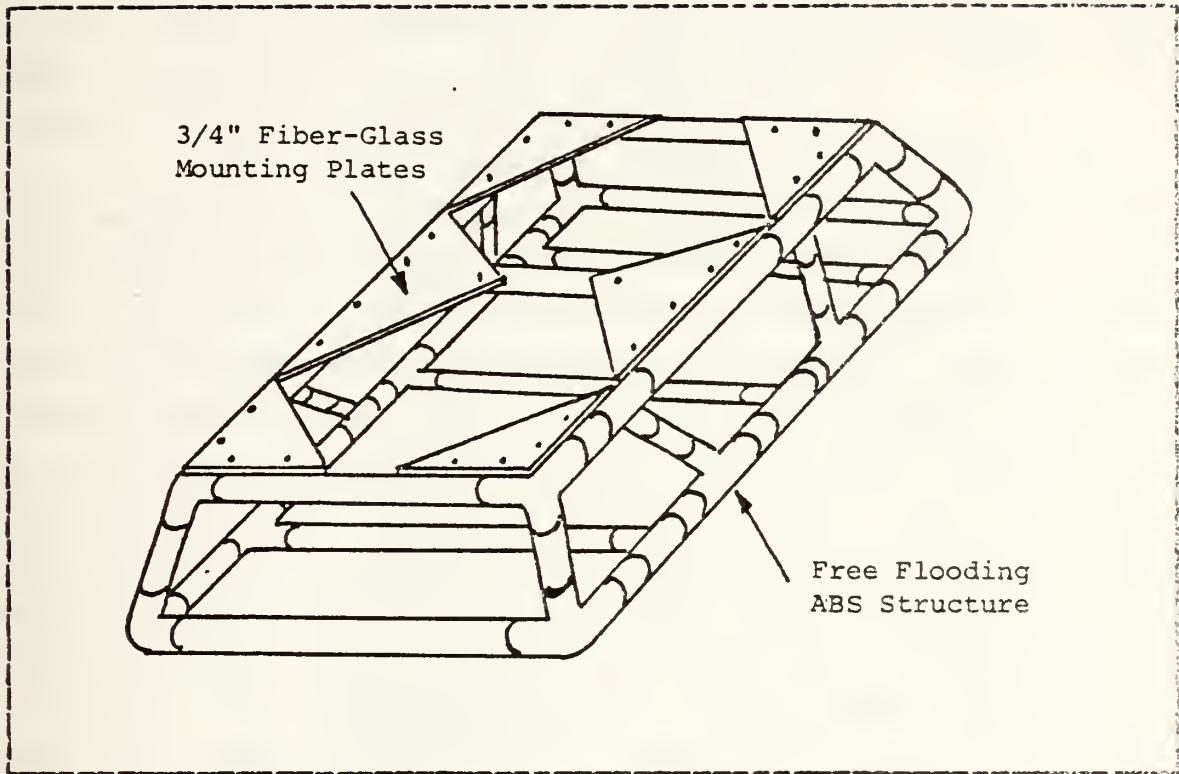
Sensor Subsystem Equipment Mounting Assembly
